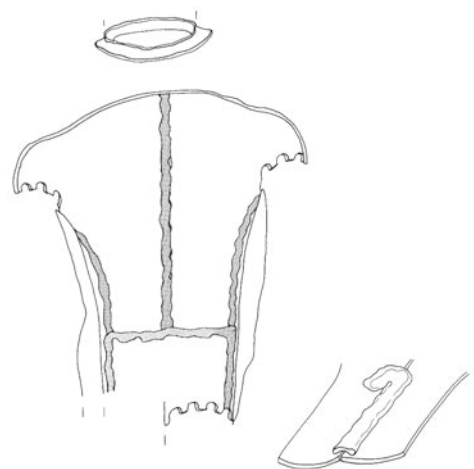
Joining the wax sections of a torso with wax. On casting these wax joins will fill with metal forming straight lines of thickening (ffg.5) (Formigli et al., 1990).
